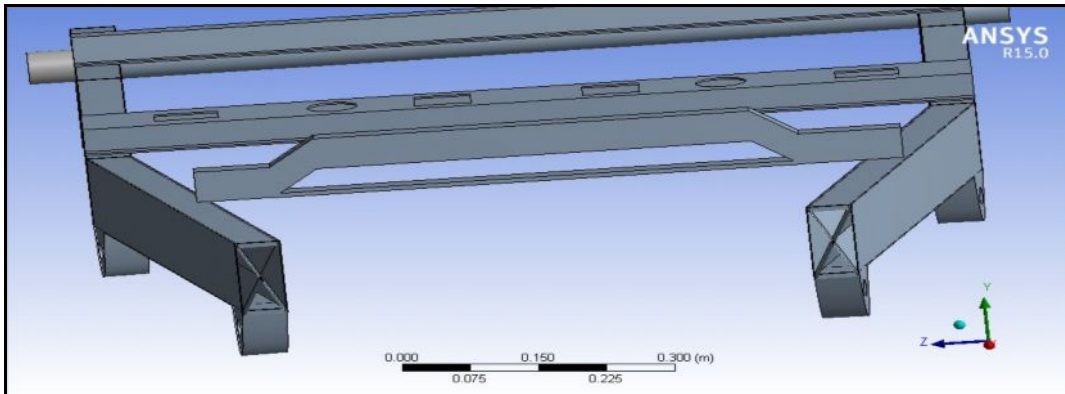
Model 7 Cut Section View of the X-Member Inside the Ladder Chassis
